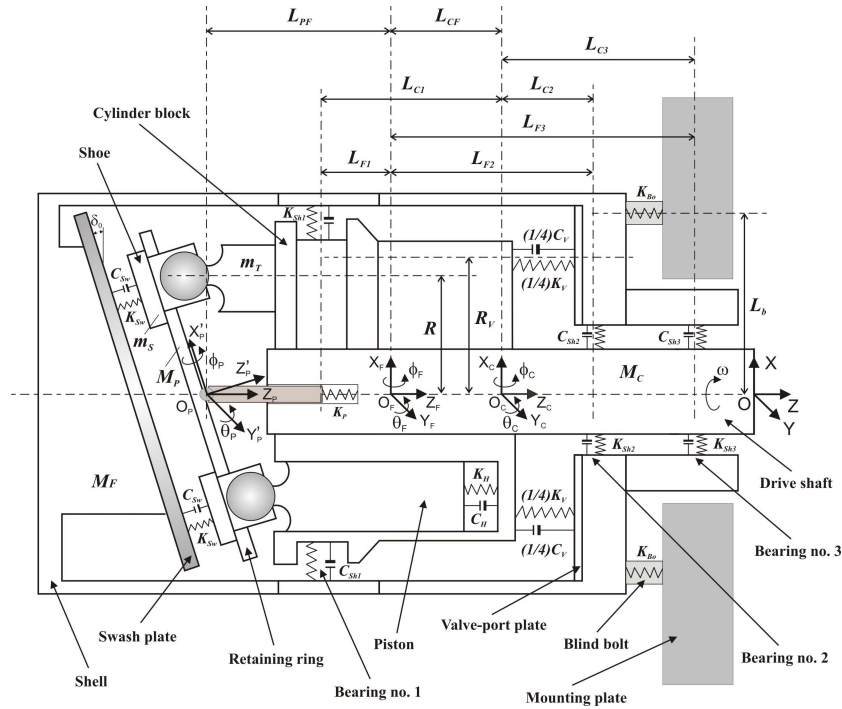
Structural scheme of dynamic model of the axial piston-pump: O_P – mass centre of the retaining ring, O_C – mass centre of the cylinder block and drive shaft assembly, O_F – mass centre of the shell assembly
